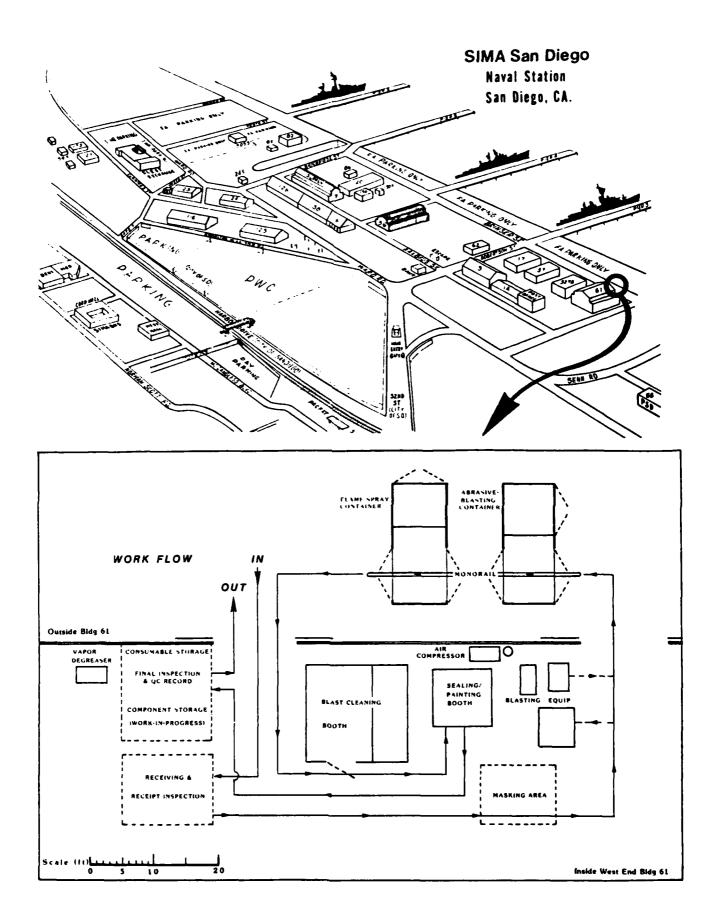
PILOT CC SHOP ARRANGEMENT - BUILDING 61
